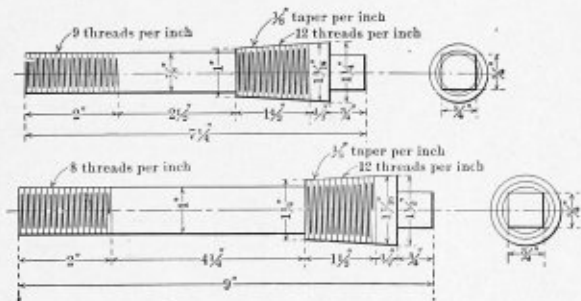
STANDARD TAPER CROWN BOLTS.
